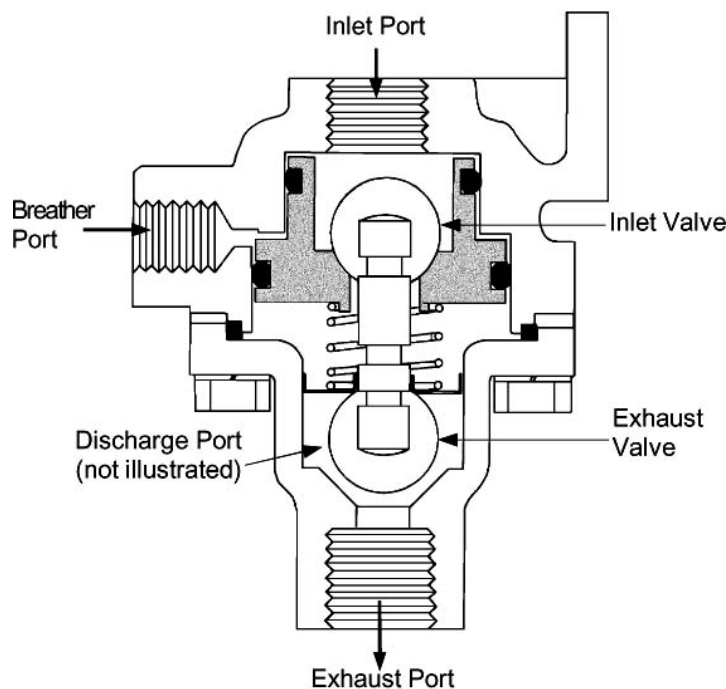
Pressure Proportioning Valve - Cross Sectional View
